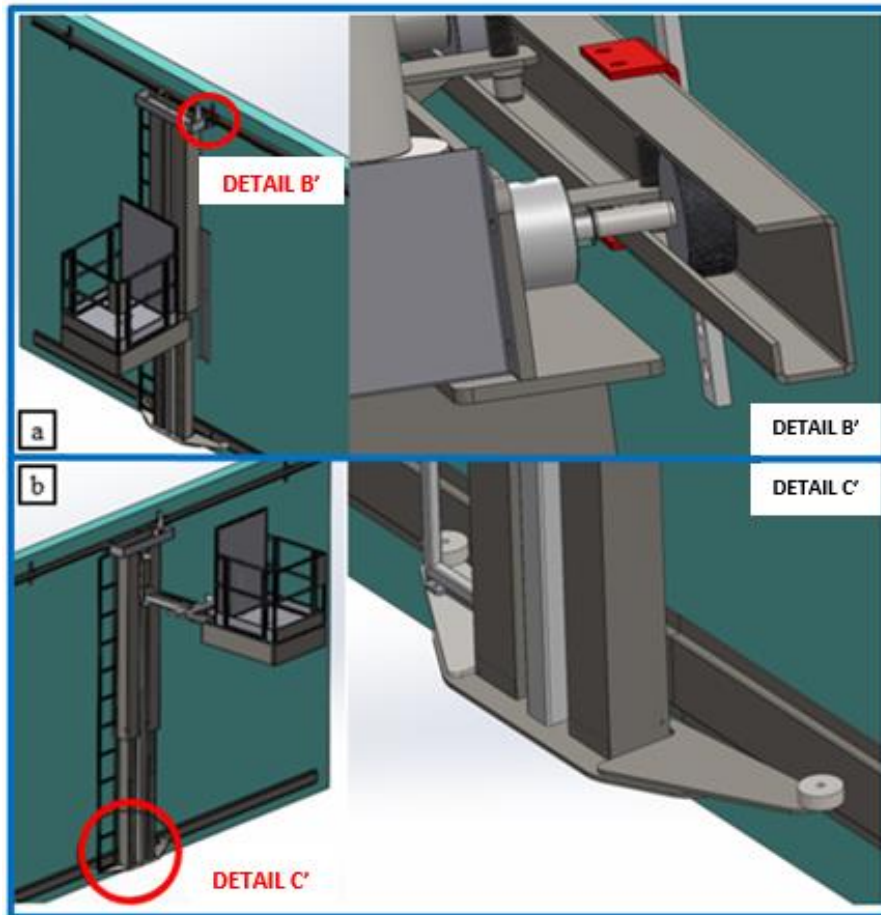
a) Triaxial Pneumatic Operator Carrier Platform, b) Operator Control Console
